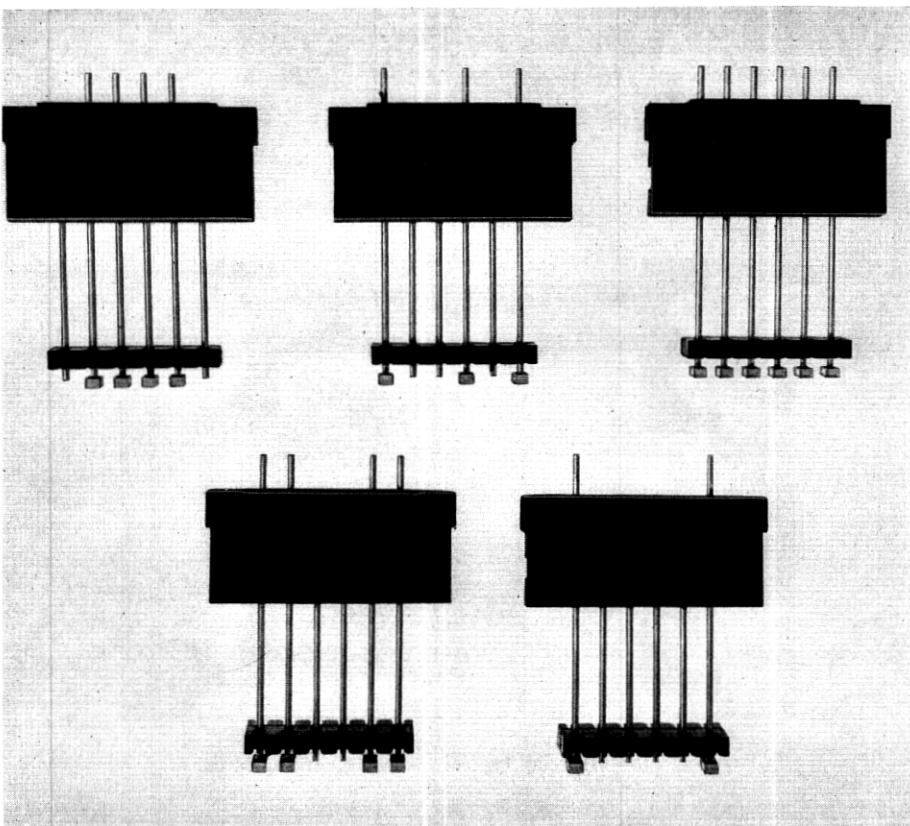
BF relay typical fixed single wire contact assemblies.
